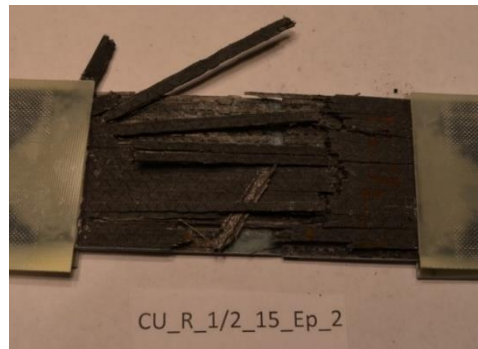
Post Test Damage in a 5 Degree Scarf, 75% Repair Carbon Uni-Epoxy Adhesive Repair Specimen
